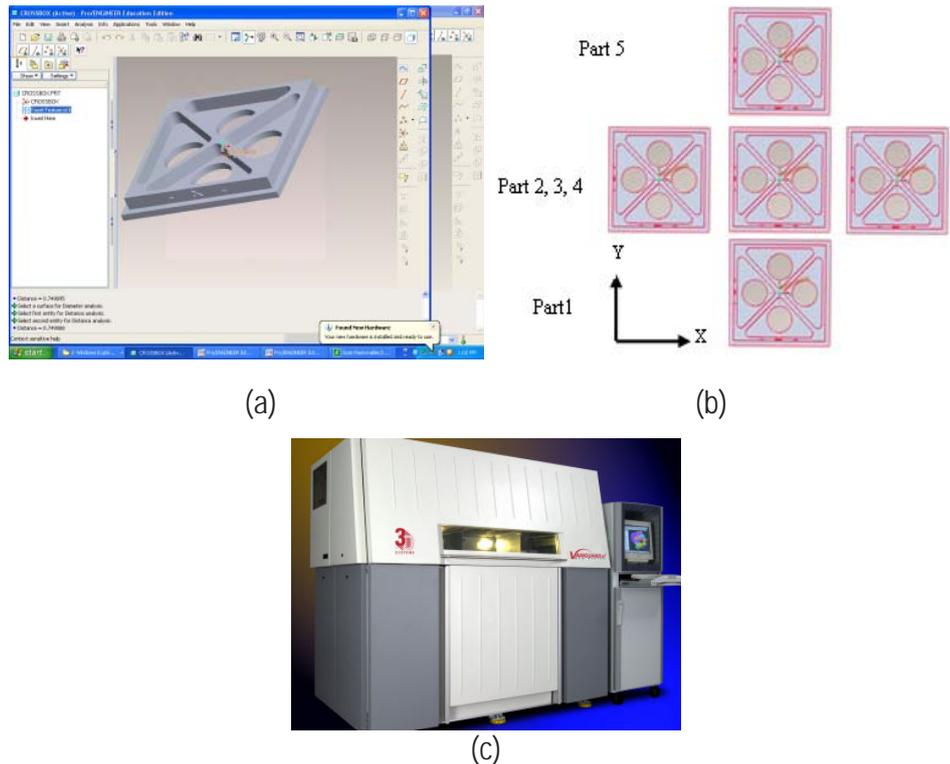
(a) CAD model of specimen used to study, (b) Layout of different parts placed in machine bed, (c) SLS setup used for fabrication of parts
